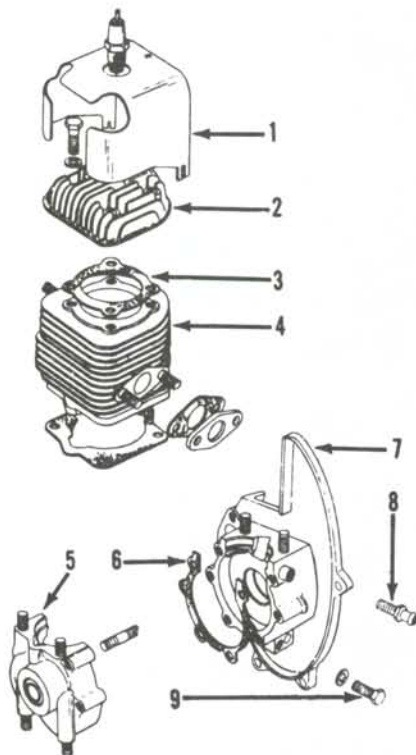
Exploded view of crankcase, cylinder and associated parts on single cylinder models.
